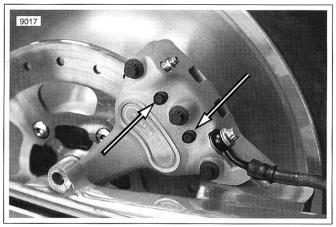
Rear Caliper Pad Pins (12 pt/0.25 in.)
